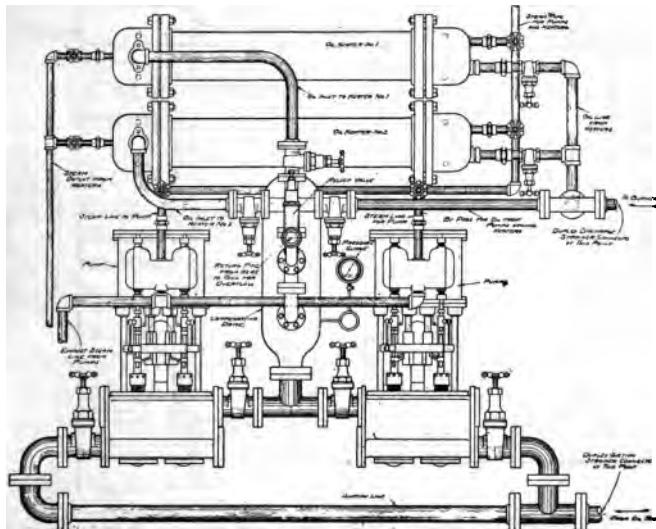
Fuel Oil Pumping, Heating and Regulating System.
